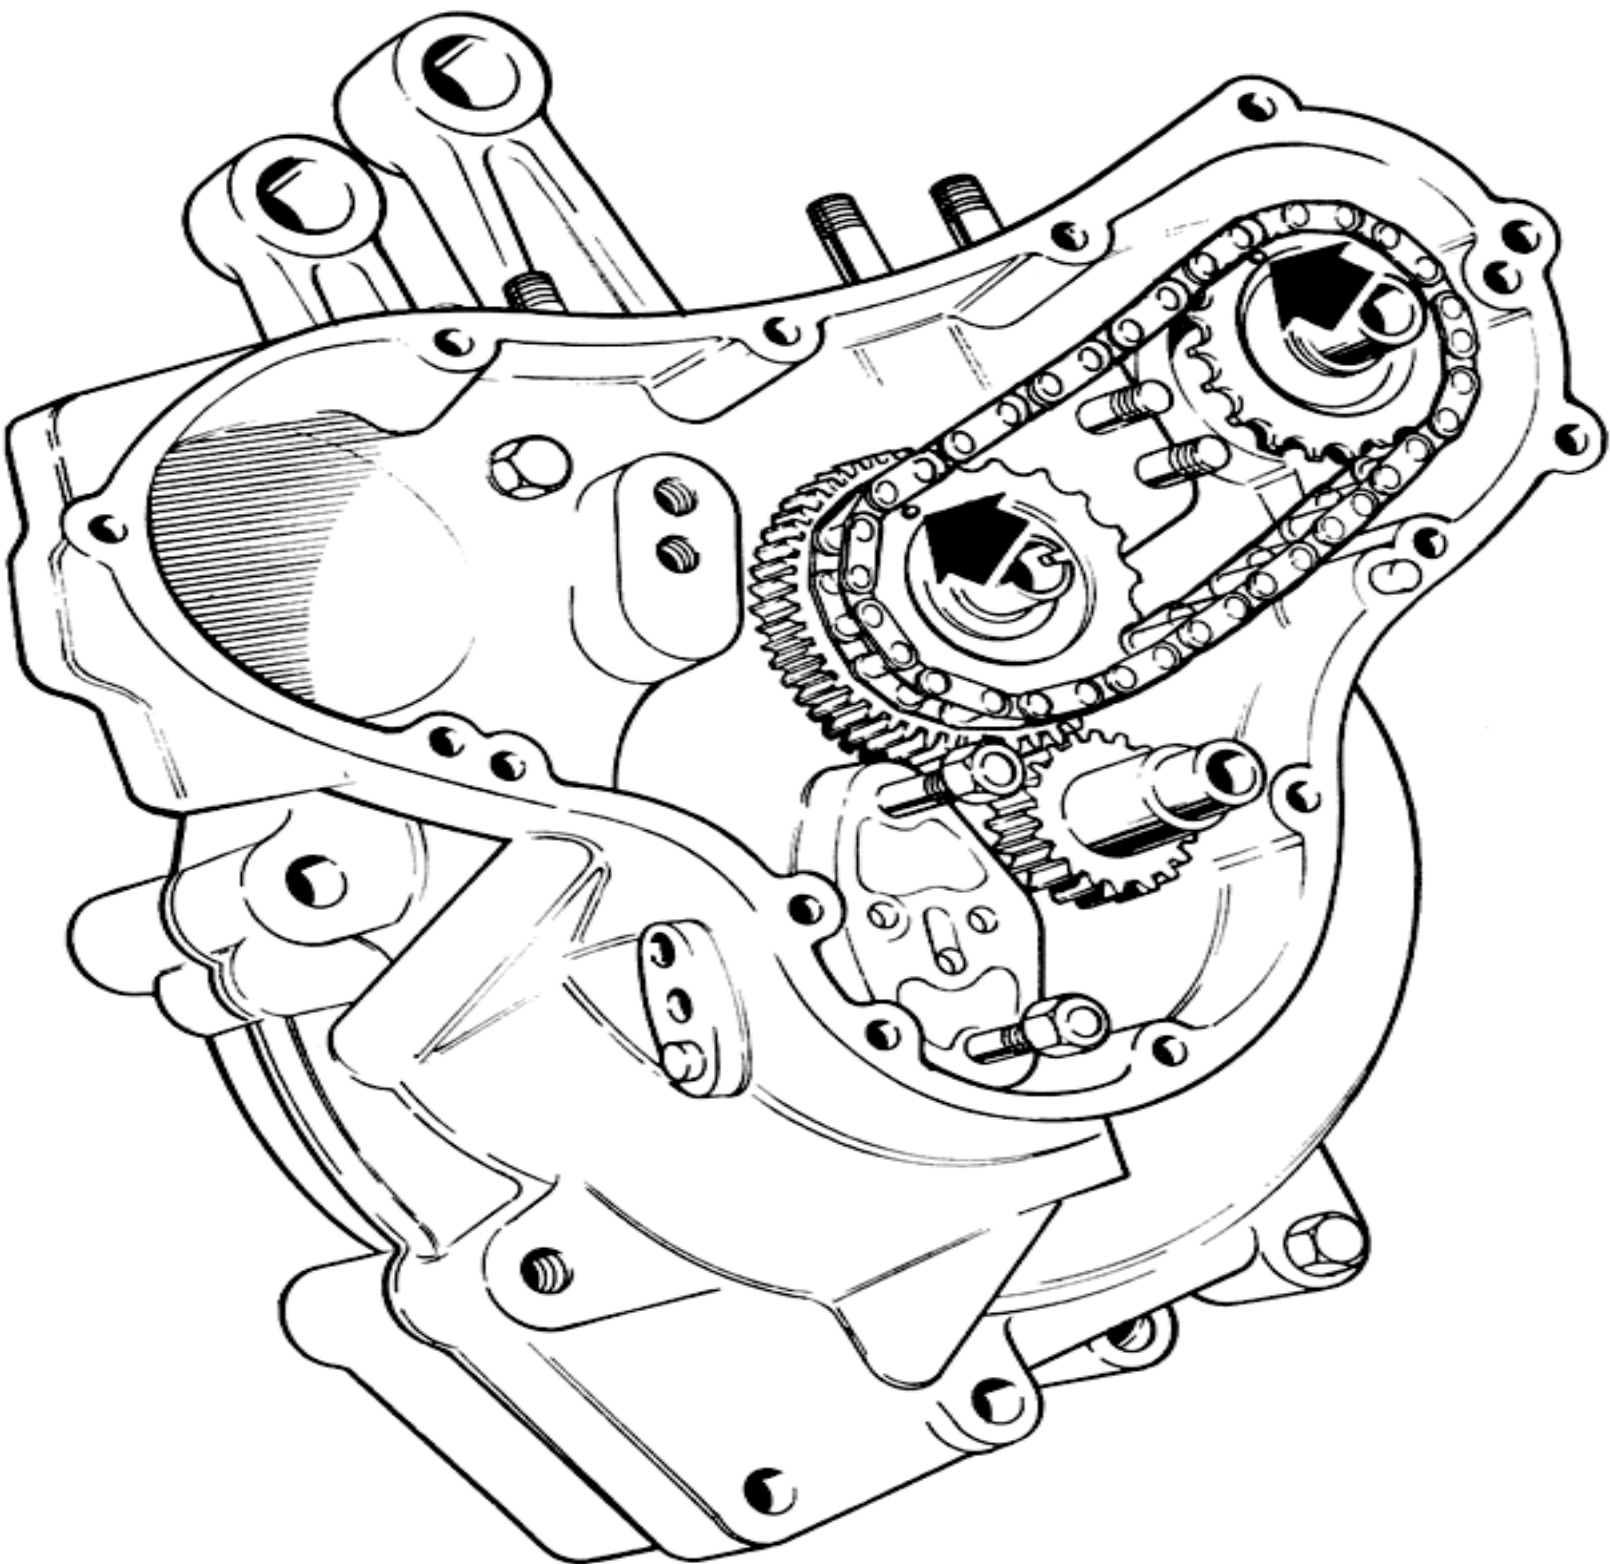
Mating crankcases. Note the camshaft is held against the spring and disc with the finger
